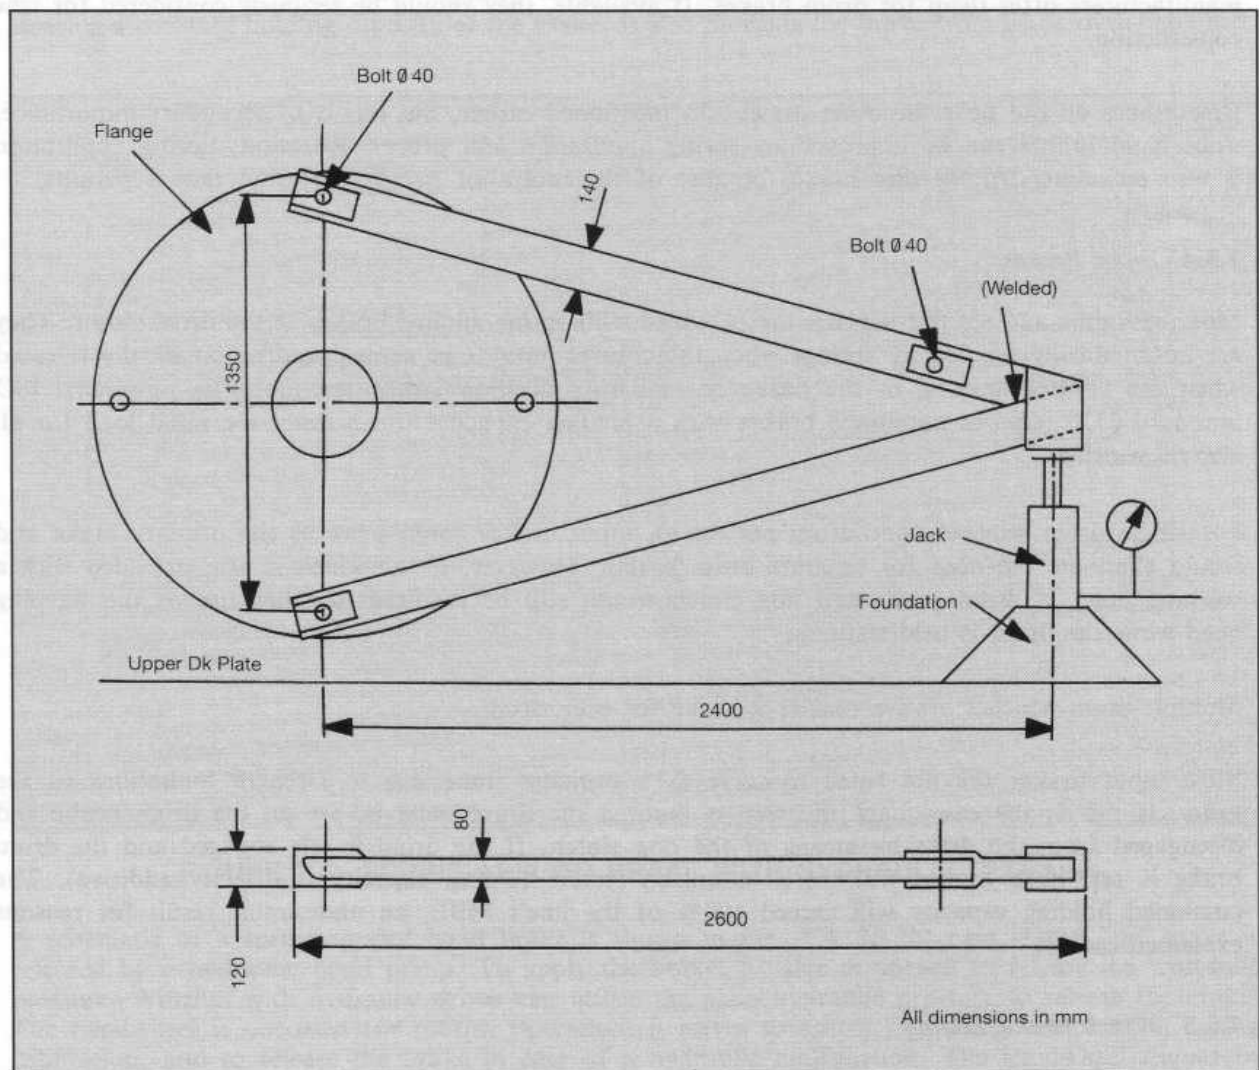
TYPICAL WINCH BRAKE TEST EQUIPMENT
